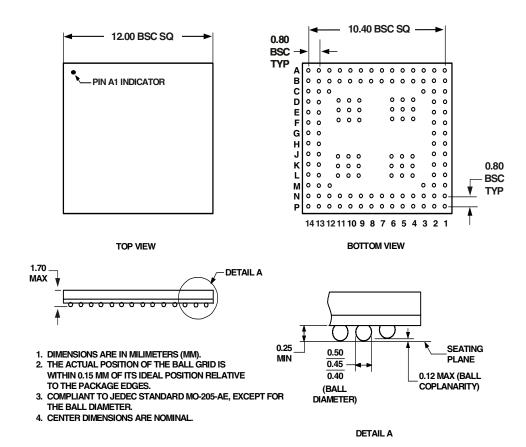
136-Lead Chip Scale Package Ball Grid Array [CSP\_BGA](BC-136-2)
